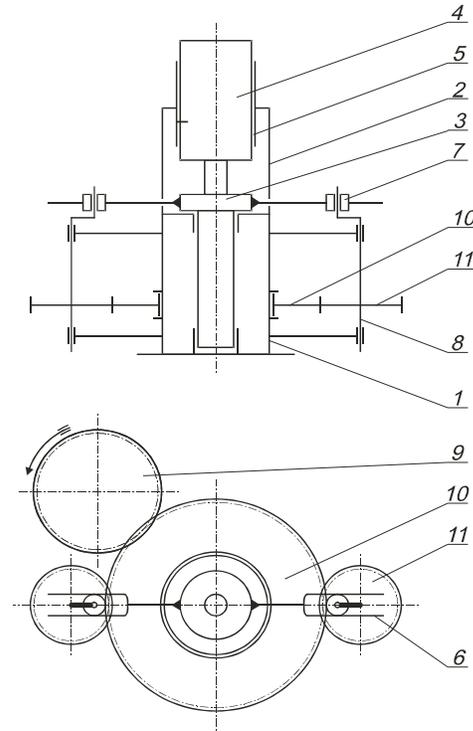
Kinematics scheme of device for compression with oscillatory torsion. 1 – Lower casing, 2 – Upper casing, 3 – Lower punch, 4 – Upper punch, 5 – Sliding nonrotary bearing, 6 – Fork (lower punch arm), 7 – Roller, 8 – Crankshaft (eccentric), 9 – Driving toothed wheel, 10 – Toothed ring, 11 – Toothed wheel
